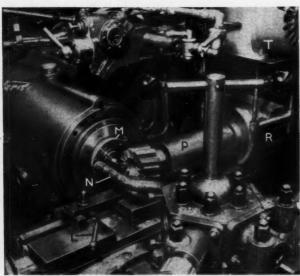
Ward 2C capstan lathe with a special motor-driven milling attachment mounted in place of the rear tool-box. With this arrangement, main drive ball spindles are finished at one set-up
